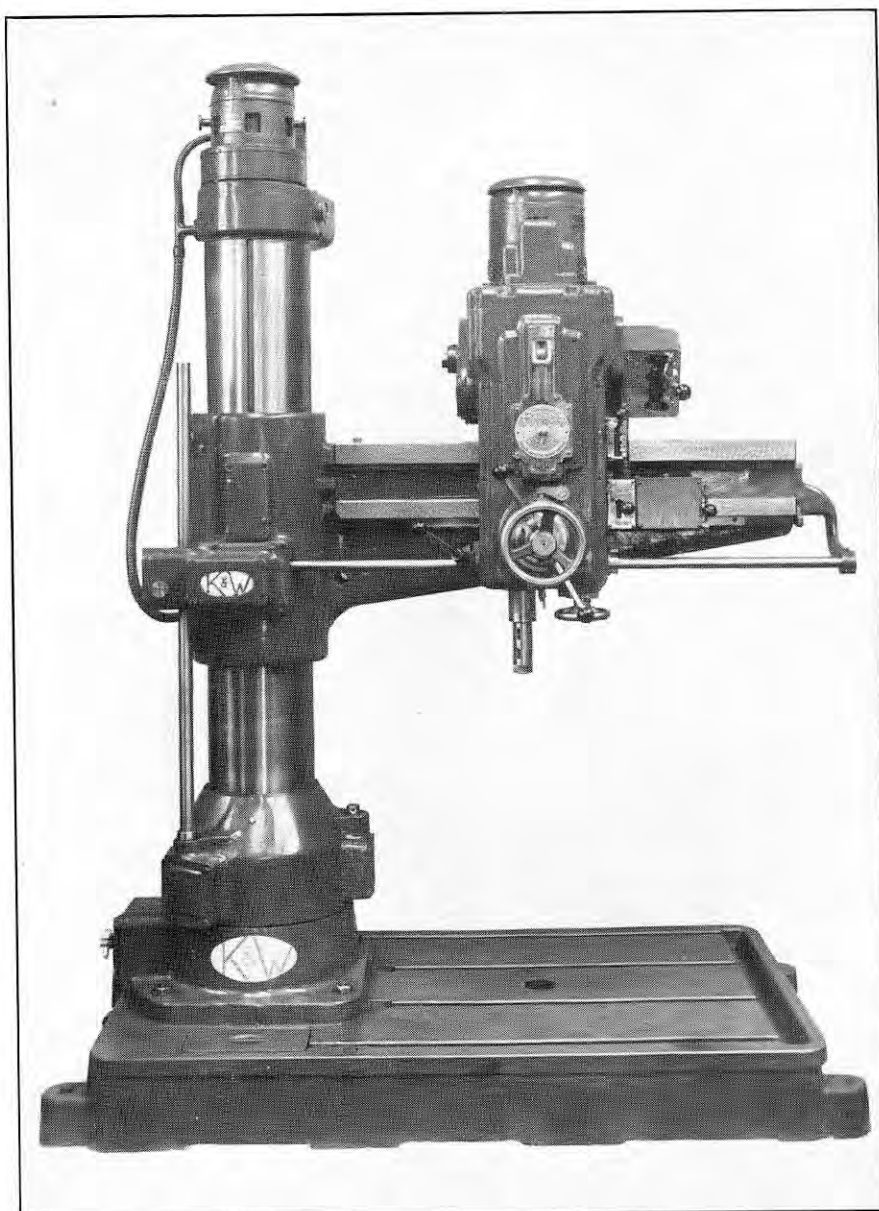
3 FT. 6 IN. RADIAL DRILLING MACHINE;
